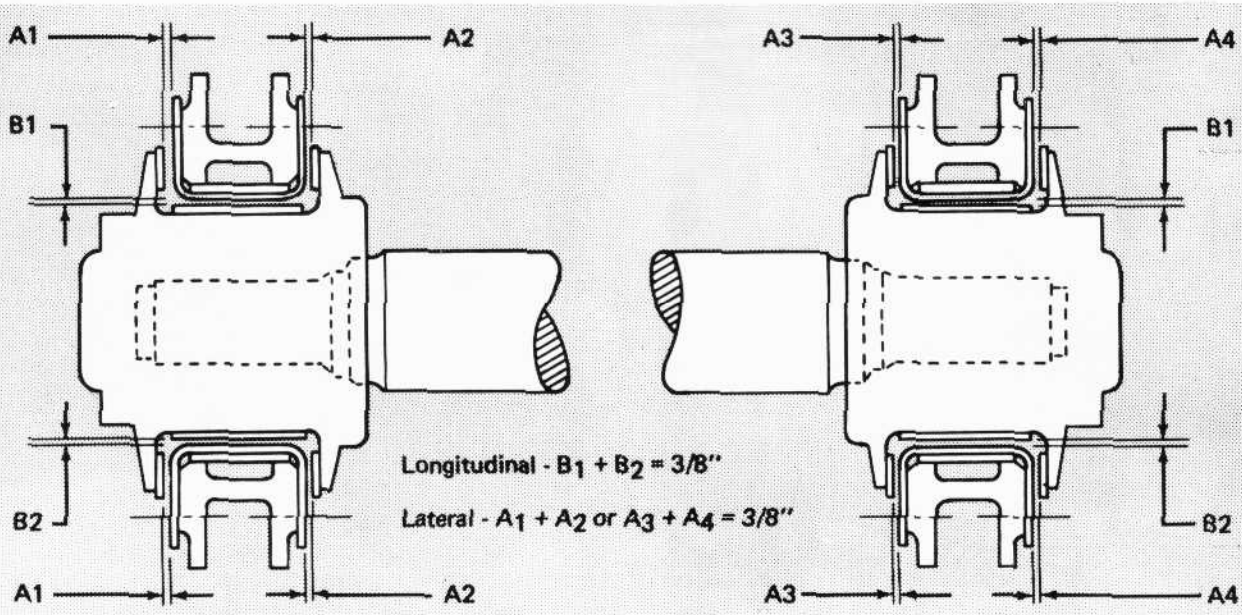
Pedestal Liner To Journal Box Wear Limits
